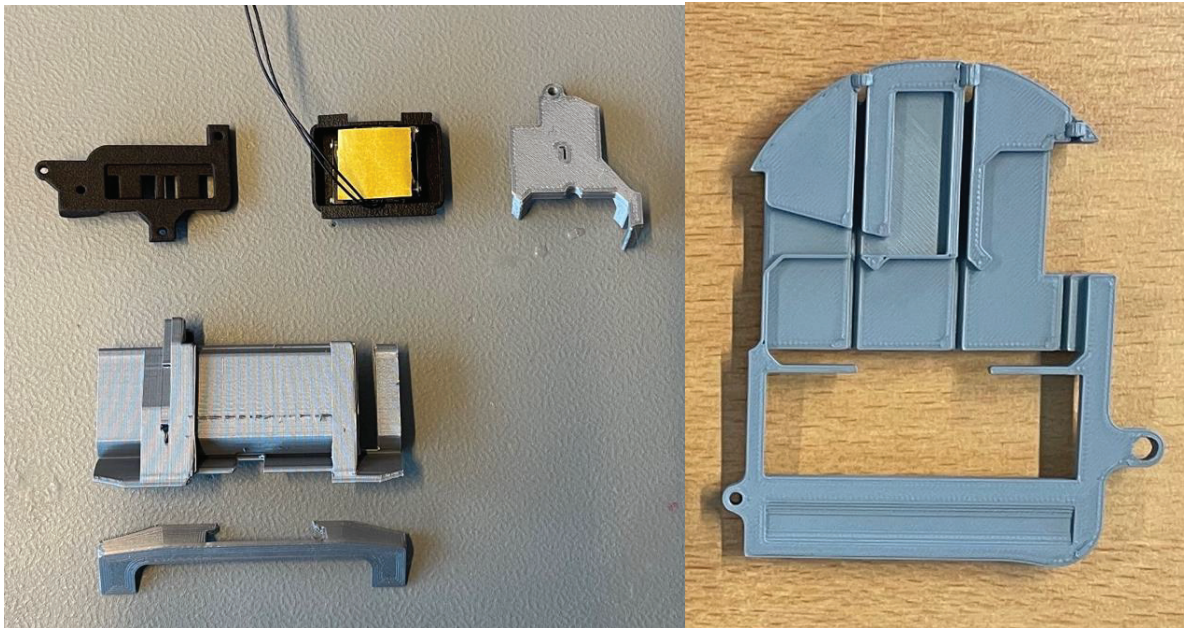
Left: inserts used to constrain components in original Nova (Left to right: softglove connector, thumper casing, thumper insert, battery & FFM insert, battery/lightbar insert.). Right: single insert used to constrain battery, force feedback modules, stringpot modules and active strap motor, as well as provide channels for the FF and stringpot cables to run through. Note that the thumper and lightbar components have not been integrated as they are obsolete in Nova version 2, mainly because of the addition of the active strap and the removal of LEDs from the product. The softglove connector would sit at the bottom of this main insert, but is treated as a black box for this project.
